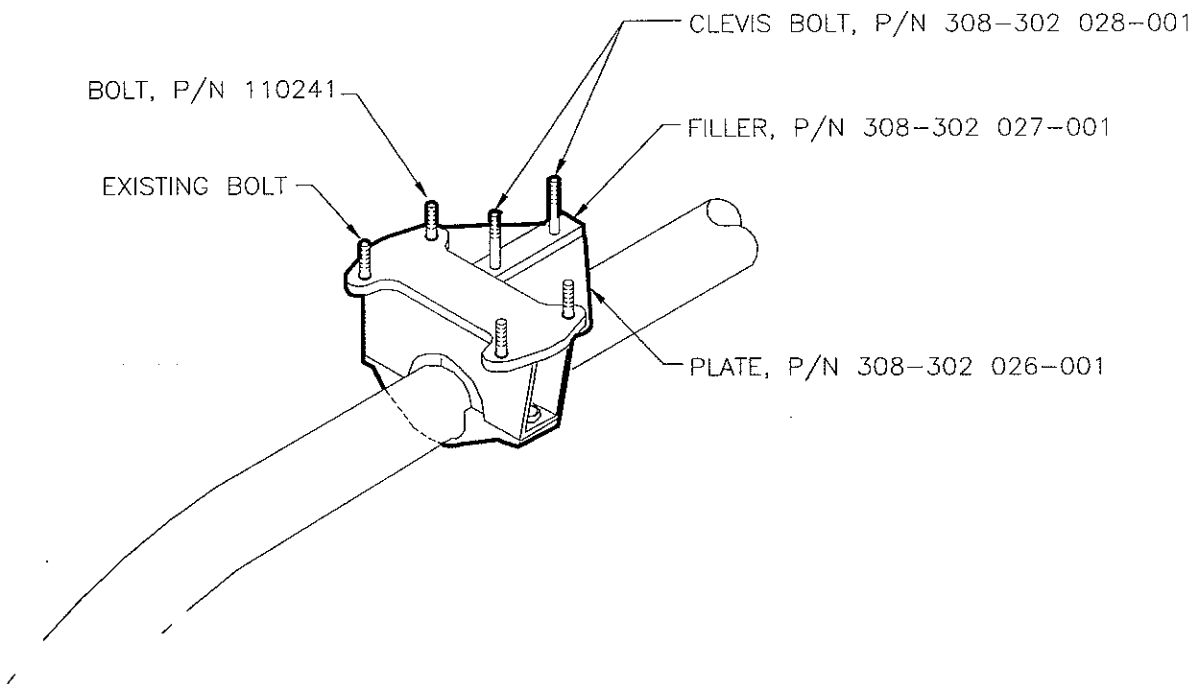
(Sheet 1 of 2), Forward Aircraft Attachment Fitting Installation (Bell Gear)
